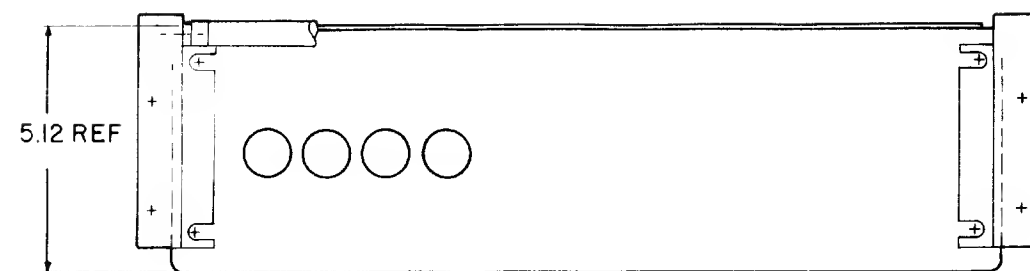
H316 Rack Mountable Unit, Dimensional View
